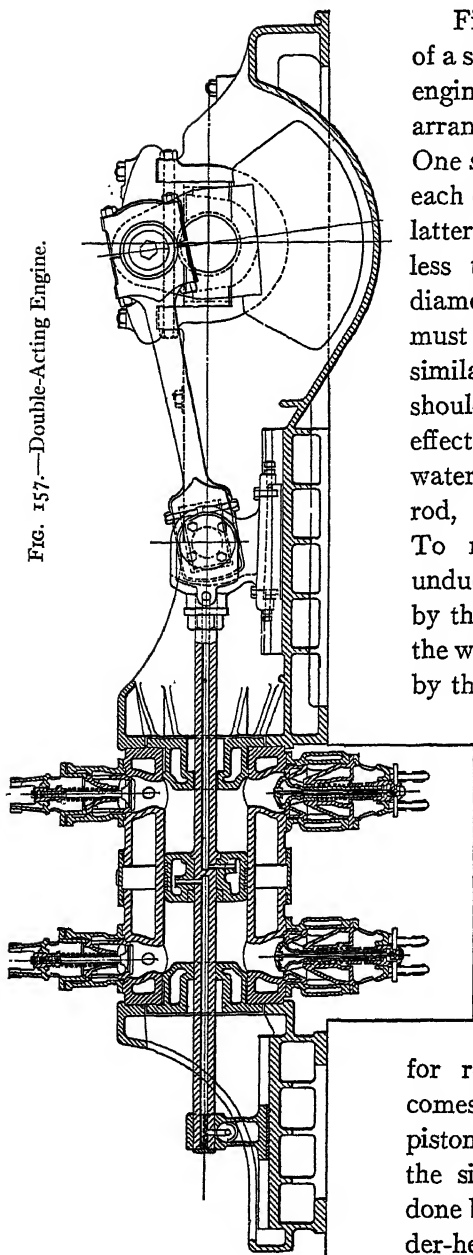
is a sectional view of a single-cylinder double-acting engine, which shows the general arrangement of its main details. One set of valves is provided for each end of the cylinder, and, the latter not being generally made less than 20 to 22 inches in diameter, the exhaust valves must be water-cooled. For a similar reason the piston also should be cooled, and this is effected by leading the cooling-water through a hollow piston-rod, as explained at page 296. To relieve the cylinder from undue wear liable to be caused by the dead load of the piston, the weight of the latter is carried by the main and the rear cross-heads.
